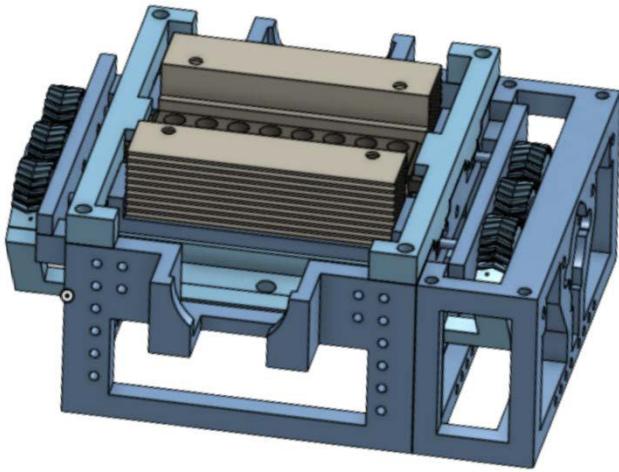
Assembly of key components on the PCR device base showing block, heater frame, and motor holder.
